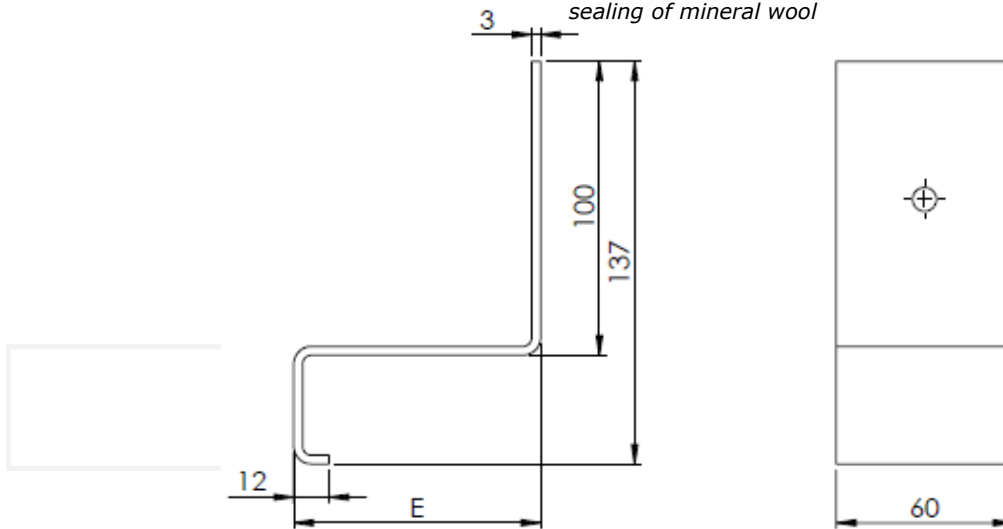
Proposed dimensions of mounting brackets for installation in a ceiling
